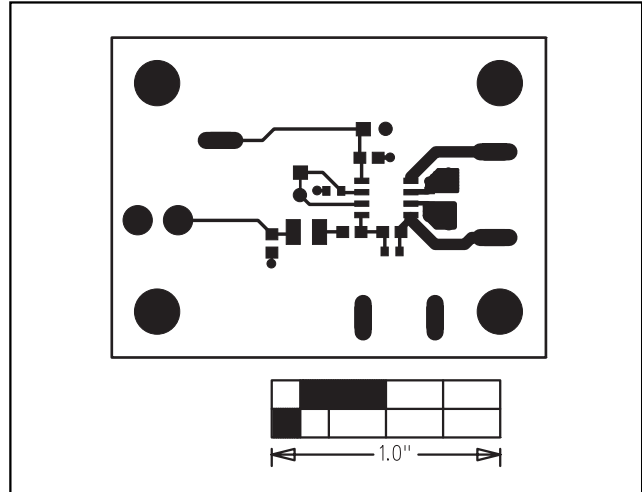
MAX4364 EV Kit PC Board Layout—Component Side
